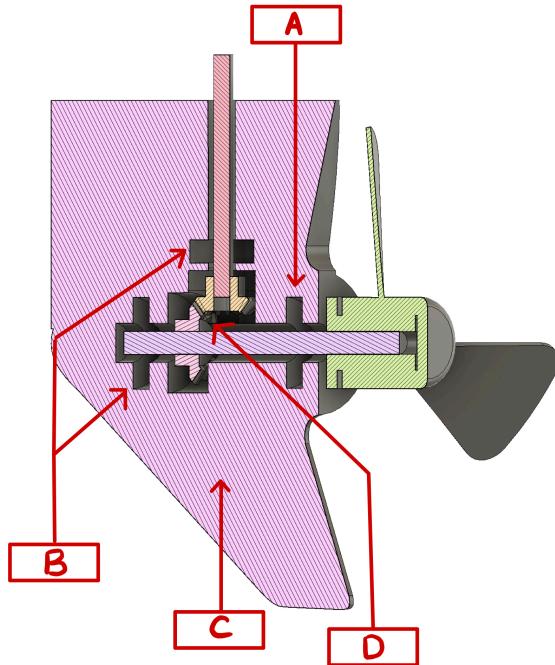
3D Model Bevel Gear Driven Sub-Assembly
